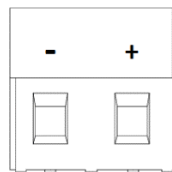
Connector JOUT (view facing wire access with polarity shown).
